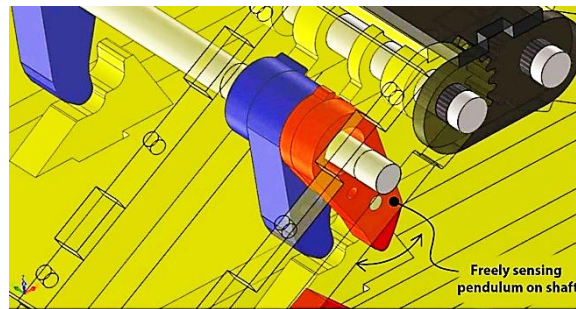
Zoom in to the sensing mechanism separated from locking mechanism.
